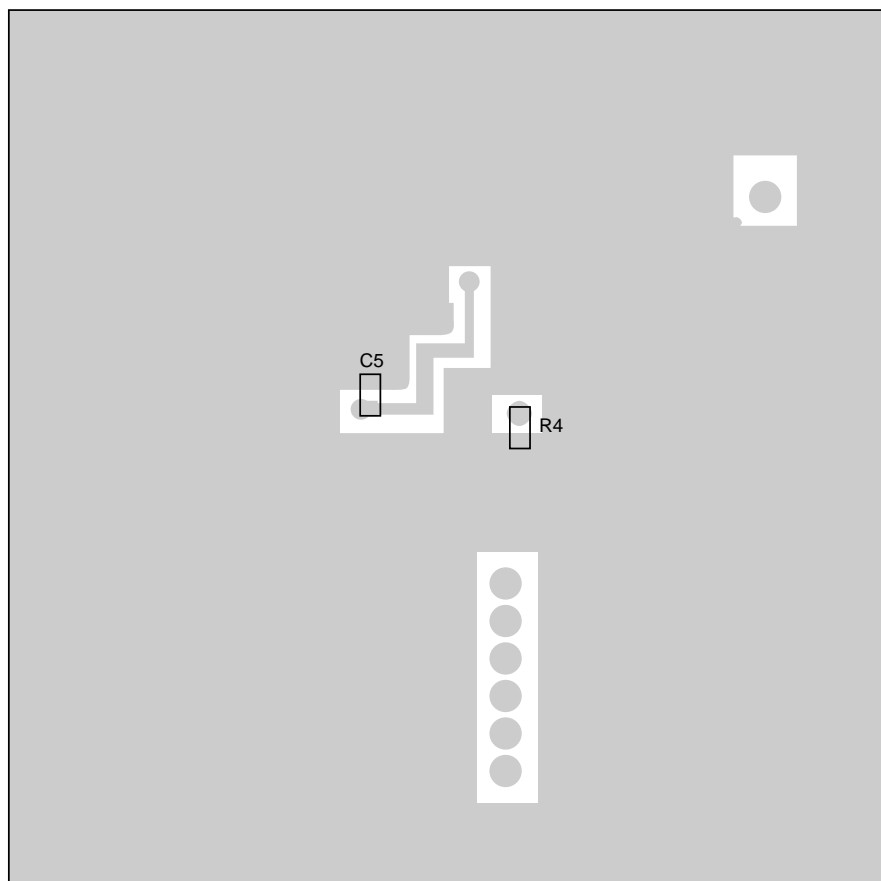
PCB top view with components for LQFP32; test circuit Fig.6.
